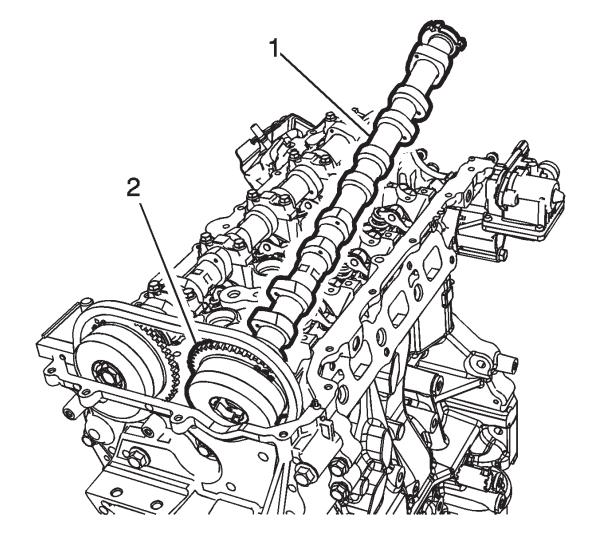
Camshaft Assembly Courtesy of GENERAL MOTORS COMPANY
